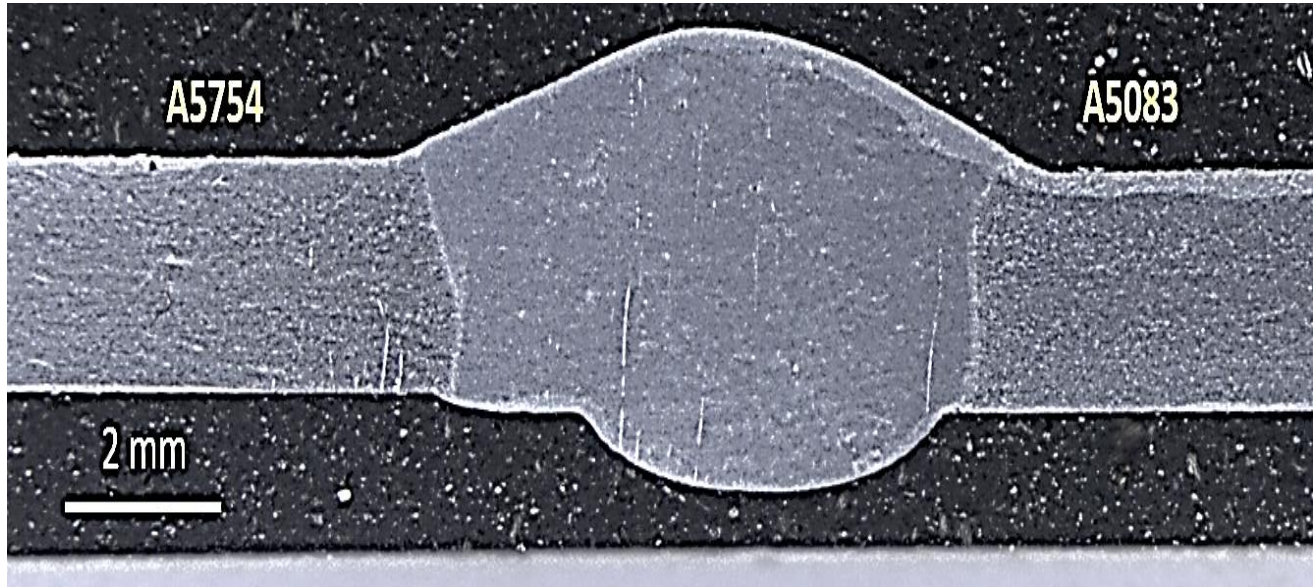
Macrostructure of transverse section of the CMT welded A5754-H111 and A5083-H111 joint using ER4043 filler wire
